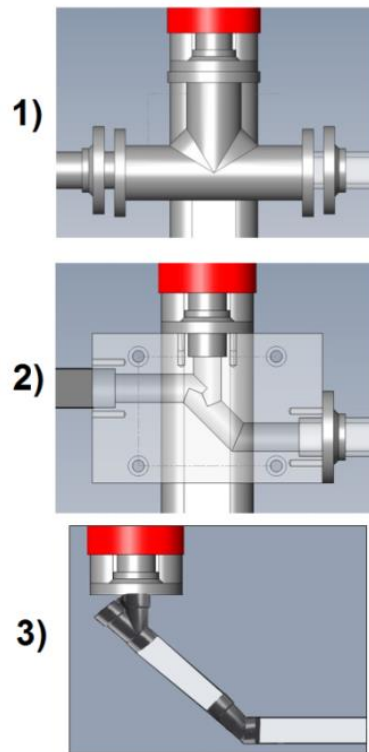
ICFAR Intermittent Solid Slug Feeder Slug Chamber Designs
